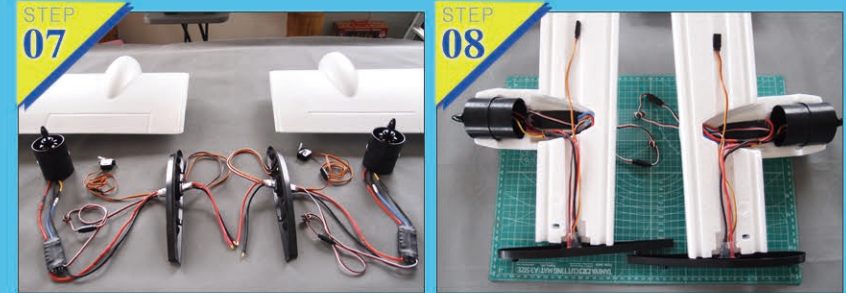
Adhere tested power equipment to wing's retaining plate by glue
